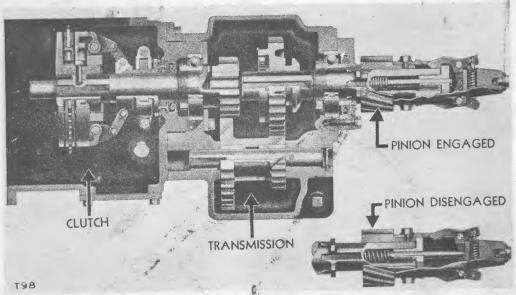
Starting Engine Clutch, Transmission and Starter Pinion
